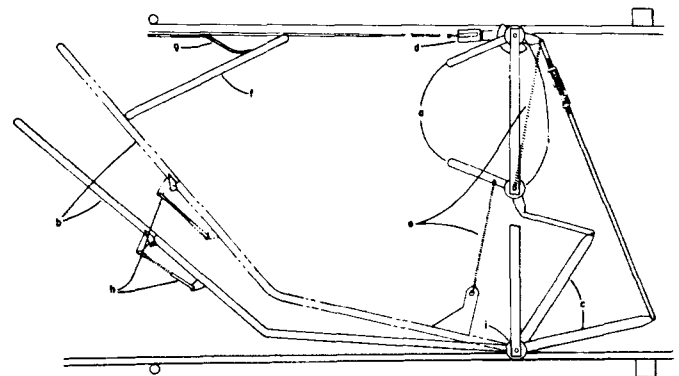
Top view of the mechanical animal-powered cow spacer and spring-loaded hinged side gate with components identified. The letters refer to the following materials; [a] half gates, [b] bars, [c] mechanical linkage, [d] spring-loaded dead-bolt mechanism, [e] spacer linkage springs, [f] spring-loaded hinged side gate, [g] leaf spring mechanism, [h] spring-loaded mechanism bars, and [i] graphite-impregnated nylon bearings.
